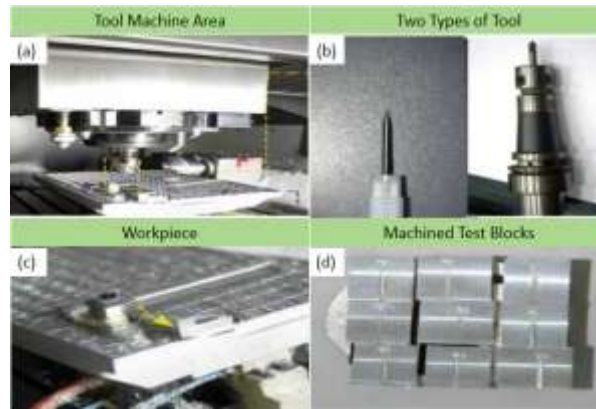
Micro milling experimental setup and environment: (a) View of the machining area of the machine tool, (b) Groove milling cutter and cutting milling cutter, (c) Processed sample, (d) Processed experimental sample
